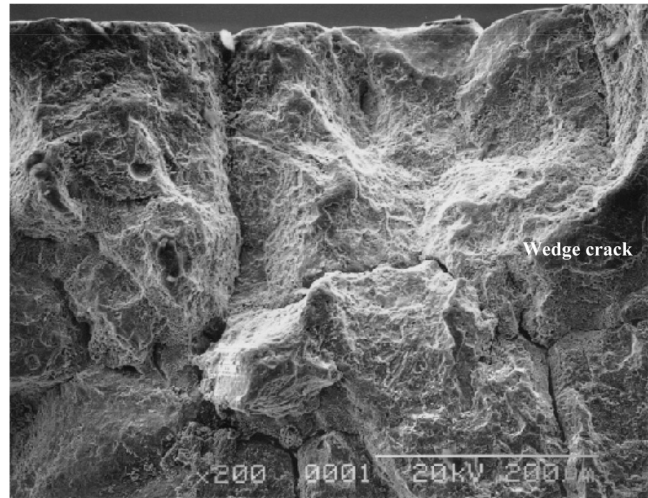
Fractographs of the mold cracks just below the mold surface showing the intergranular fracture and wedge cracks at the triple point of grain boundary.
